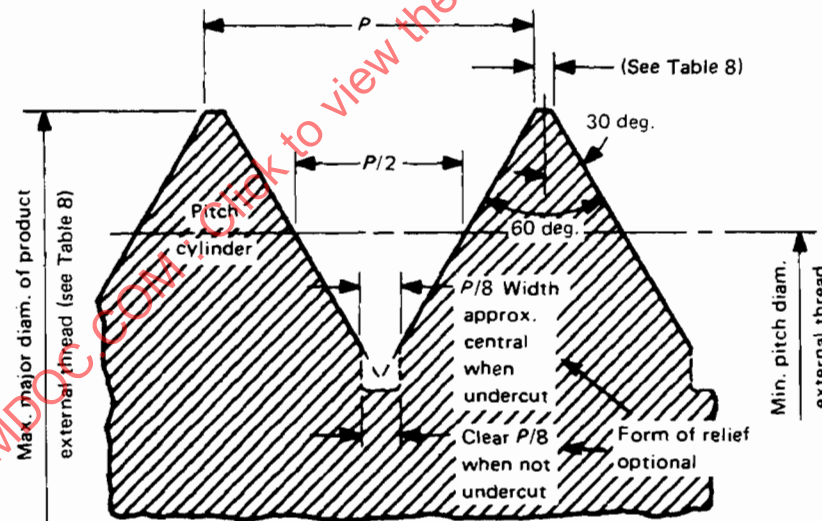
THREAD FORM OF TRUNCATED THREAD-SETTING PLUG GAGES
